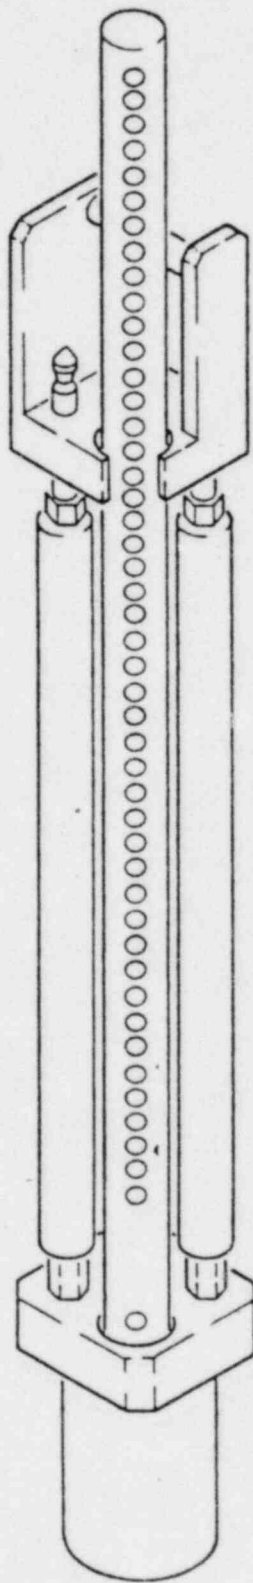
CONTROL ROD BUNDLE WITH GUIDE TUBE
